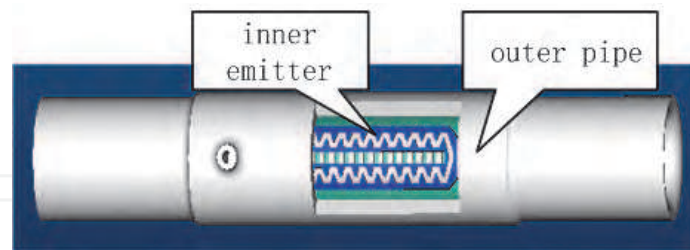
Integration of experimental three-dimensional solid CAD model of emitter
